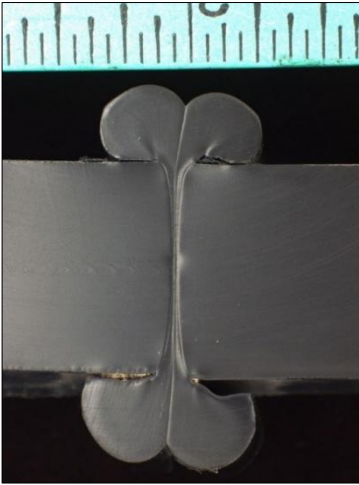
NPS 12 DR11 Pipe, Fusion Joint Cross-section after Heat-Reversion
